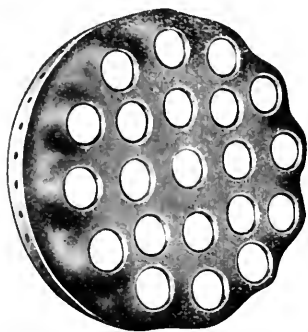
FLANGED AND CORRUGATED TUBE HEAD
